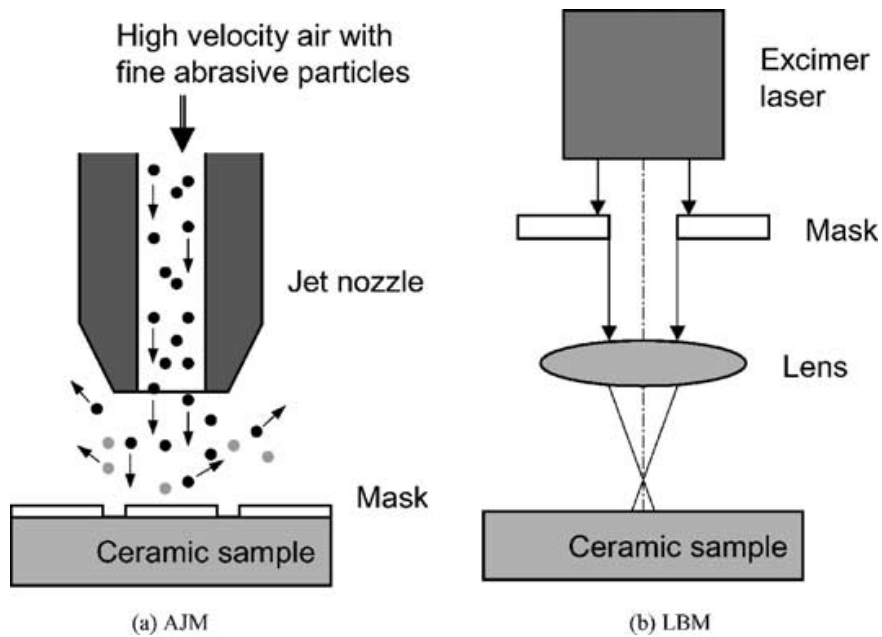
Abrasive Jet Machining (AJM) and Laser Beam Machining (LBM) are used for Texture Fabrication [25]
